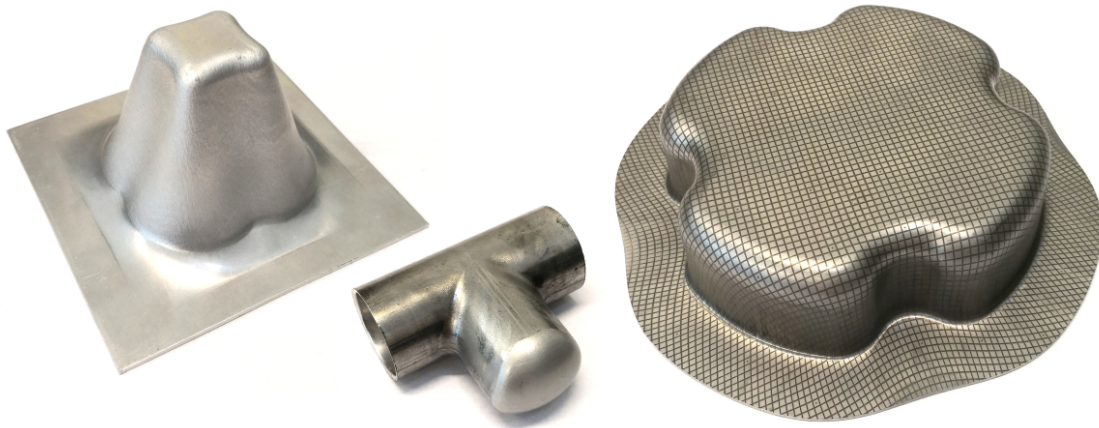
Sheet metal formed parts from the Department of Materials and Production, AAU.
